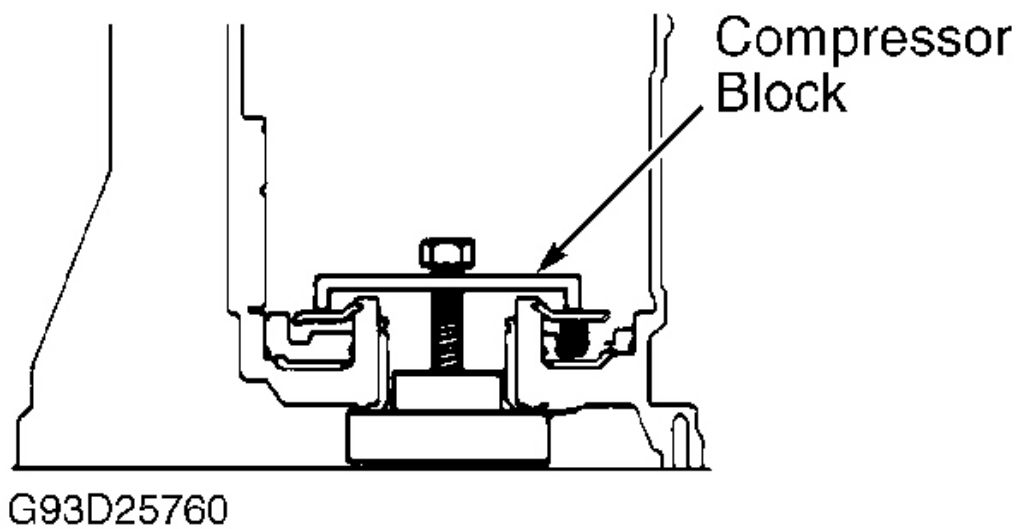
Compressing Springs Of 1st & Reverse Brake Piston
